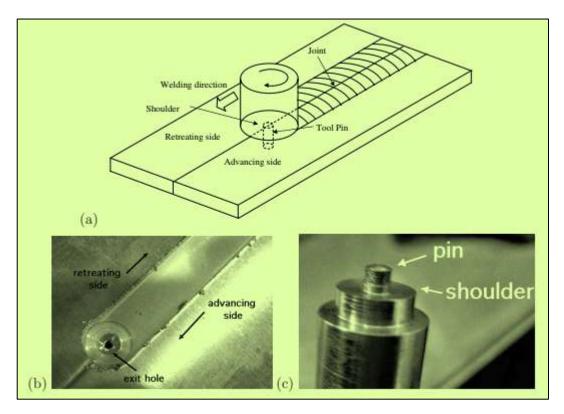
(a) Schematic illustration of the friction stir welding process. (b) An FSW weld between aluminum sheets. (c) An actual tool, with a threaded-pin.
